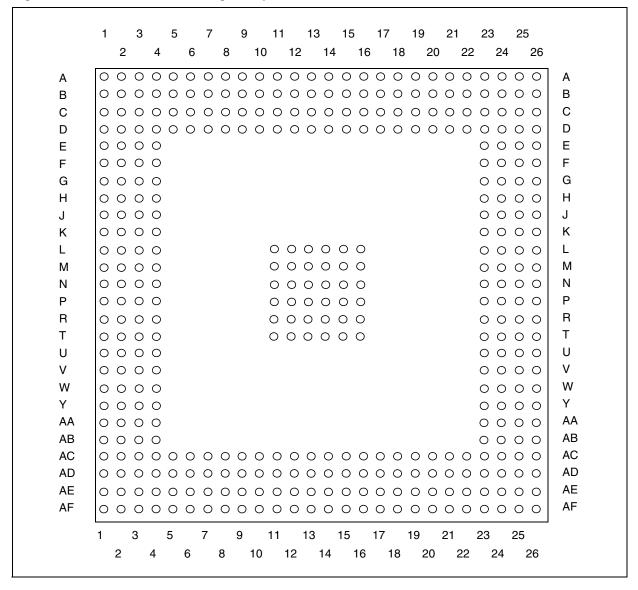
388-pin PBGA Package - PCB Dimensions
